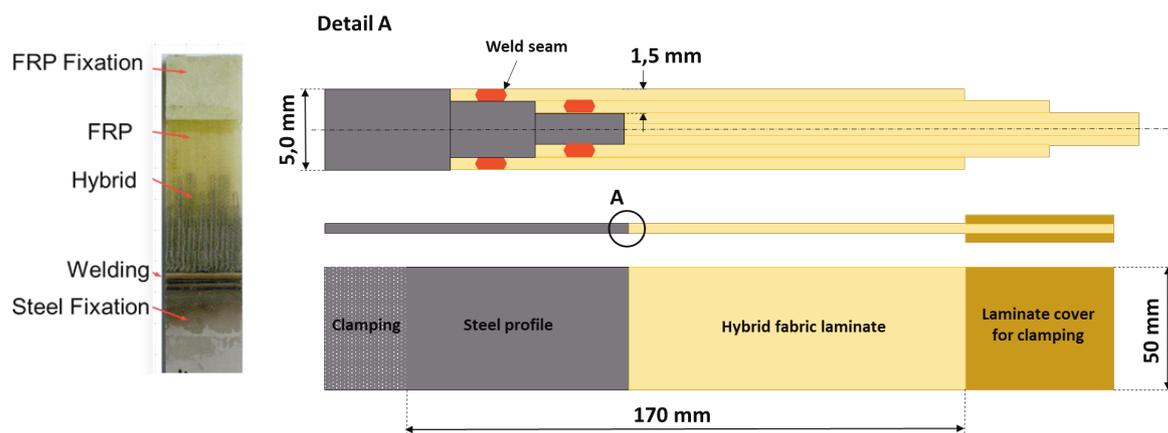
Specimen geometry and welding details. Left side: photo of specimen. Right side: schematic of layout. Note: specimen not scale
